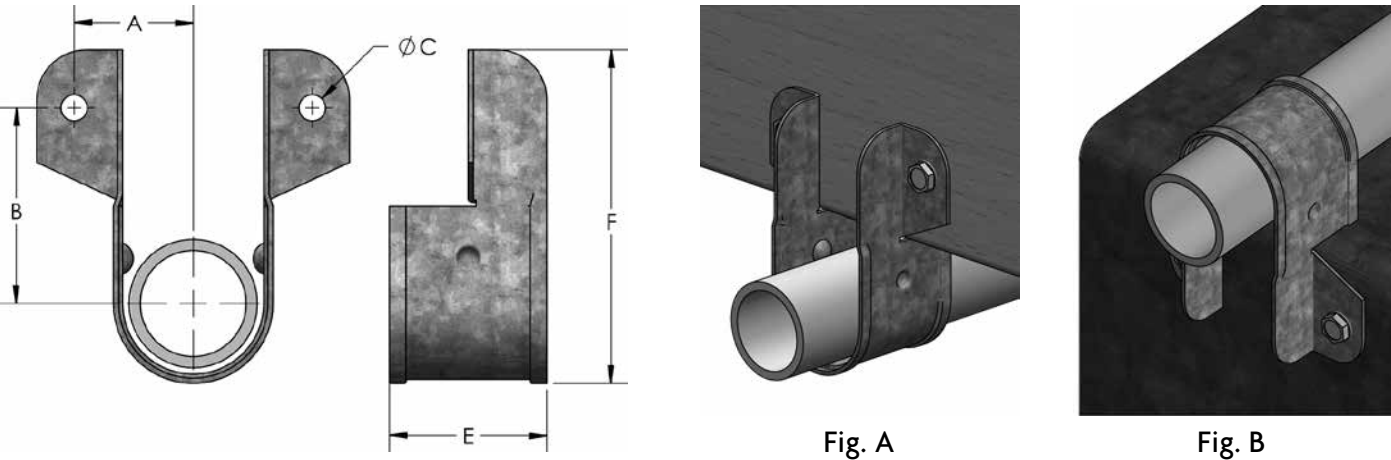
DIMENSIONS (IN) • WEIGHT (LBS)
